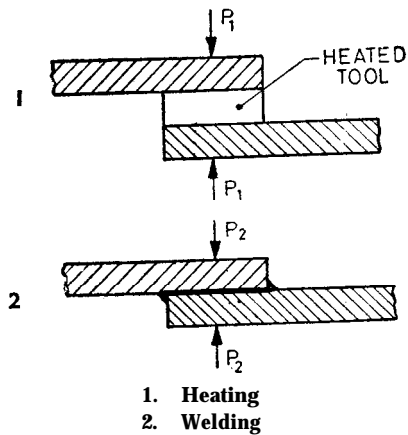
LAP JOINT WITH LAP WELD
